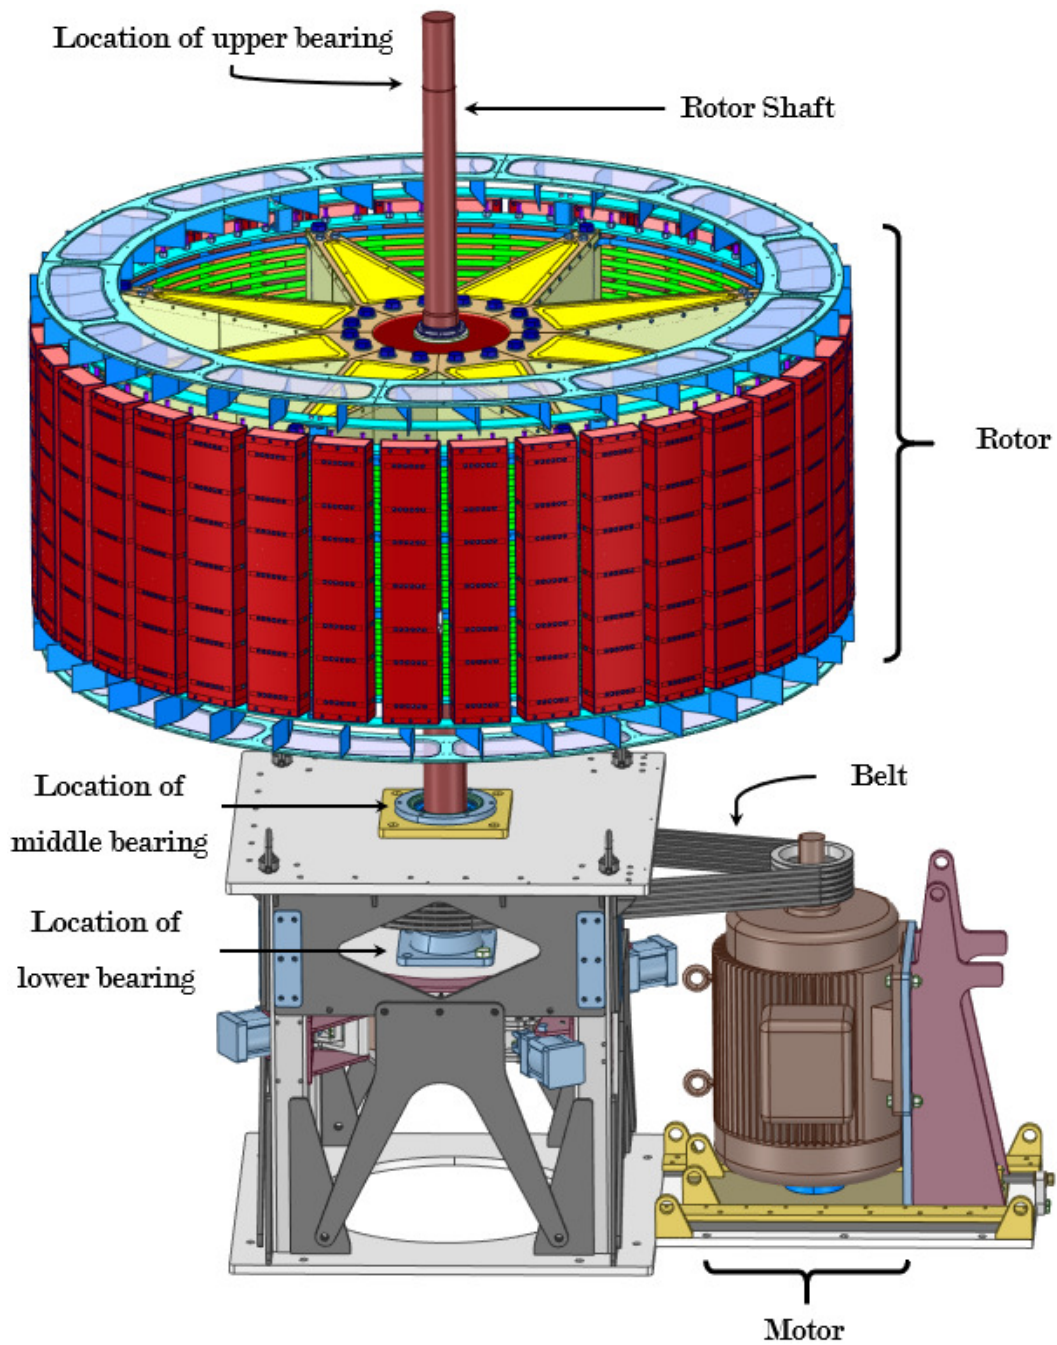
View of the motor assembly and the scale model rotor highlighting the main components (transmission belt and three bearings) that transfer the rotational mechanical energy of the electrical motor to the scale model's rotor shaft.
